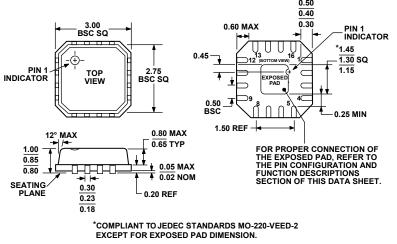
16-Lead Lead Frame Chip Scale Package [LFCSP\_VQ] 3 mm × 3 mm Body, Very Thin Quad (CP-16-2) Dimensions shown in millimeters
